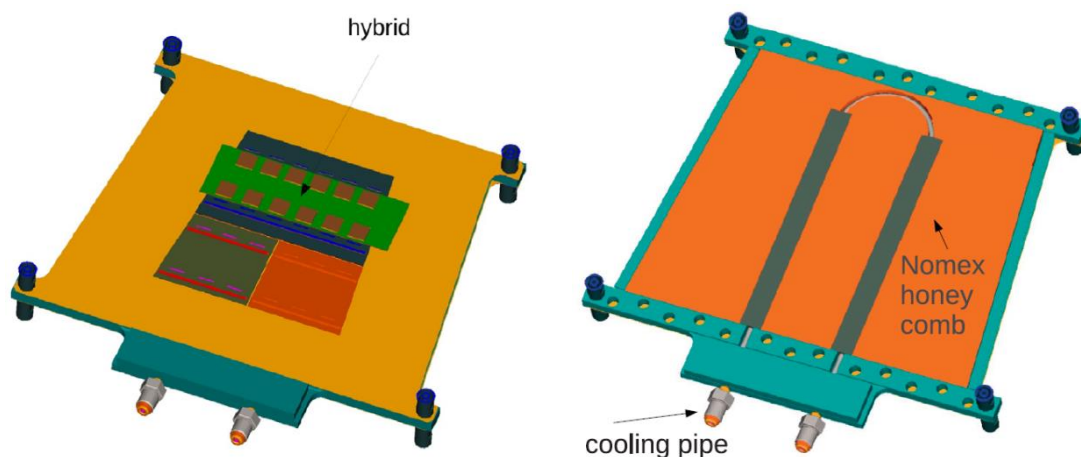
Mechanical design of the Petalet prototype. Position of a module (left) and cooling pipe design (right) [50].
